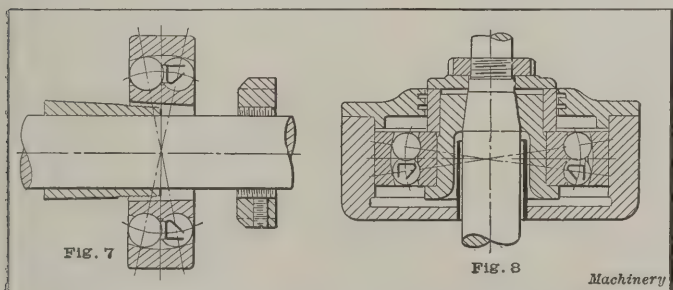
Adapter Type of Bearing. Fig. 8. Method for Retaining Lubricant in Vertical Bearing Shaft
